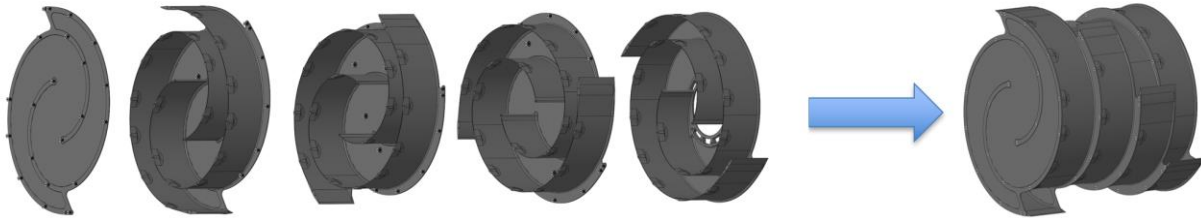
IPEX TRL-5 bucket drum assembly CAD.
